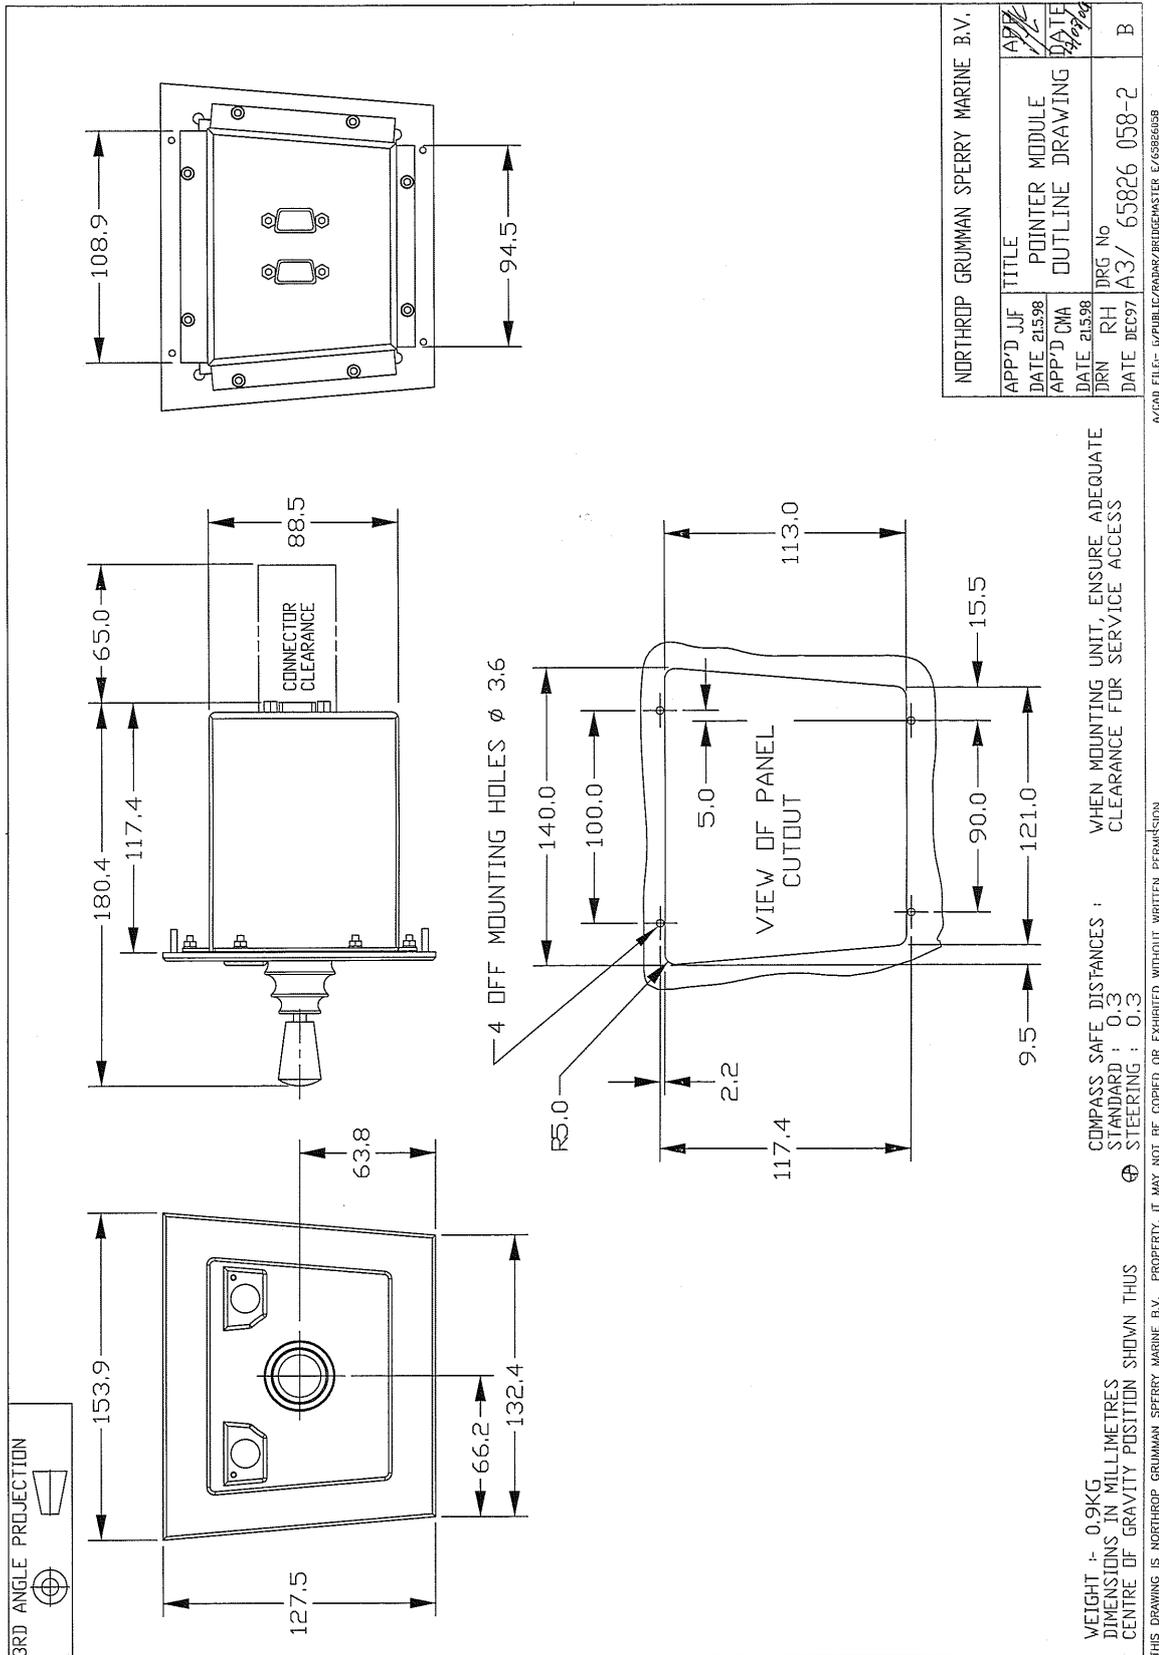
Joystick Module Outline Drawing (154mm version)
